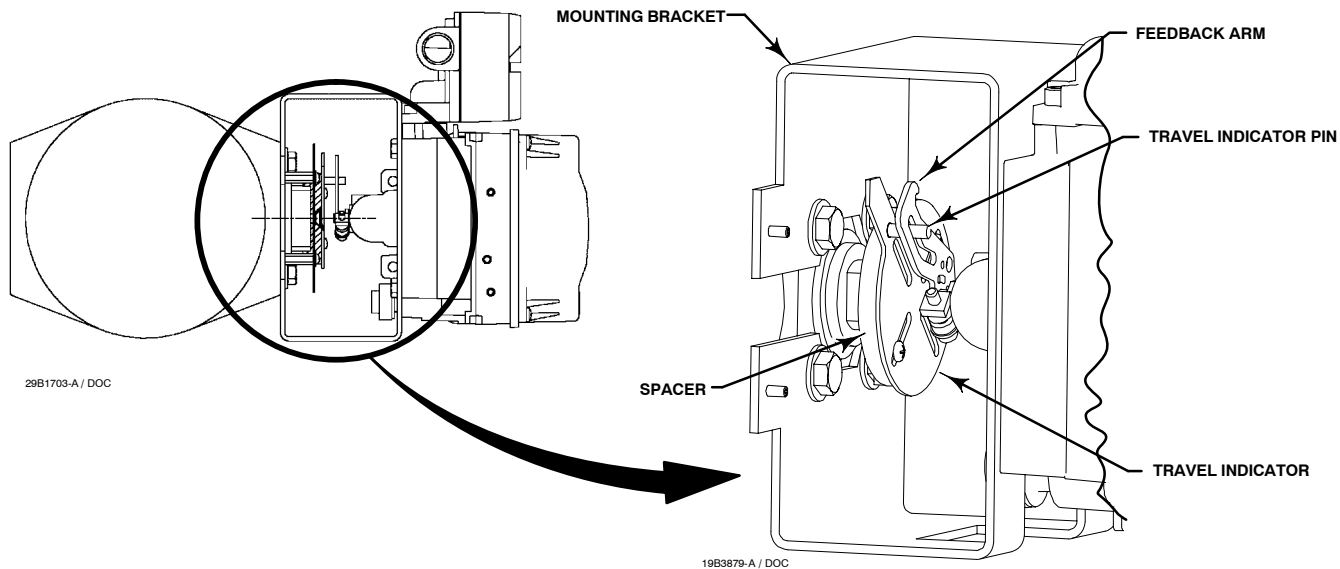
Mounting a Type DVC6030 Digital Valve Controller on a Rotary Actuator (Type 1032 Size 425A Shown)
